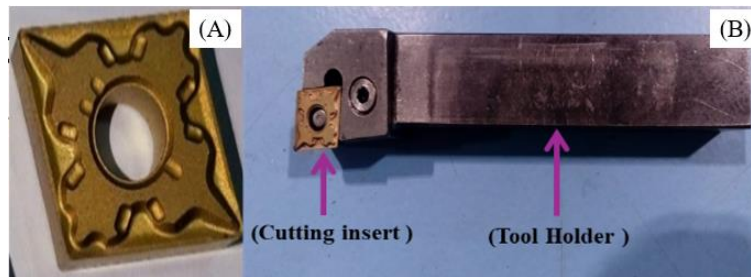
(a) CVD-coated cutting insert; (b) insert mounted on PCLNR 2020K12 tool holder
